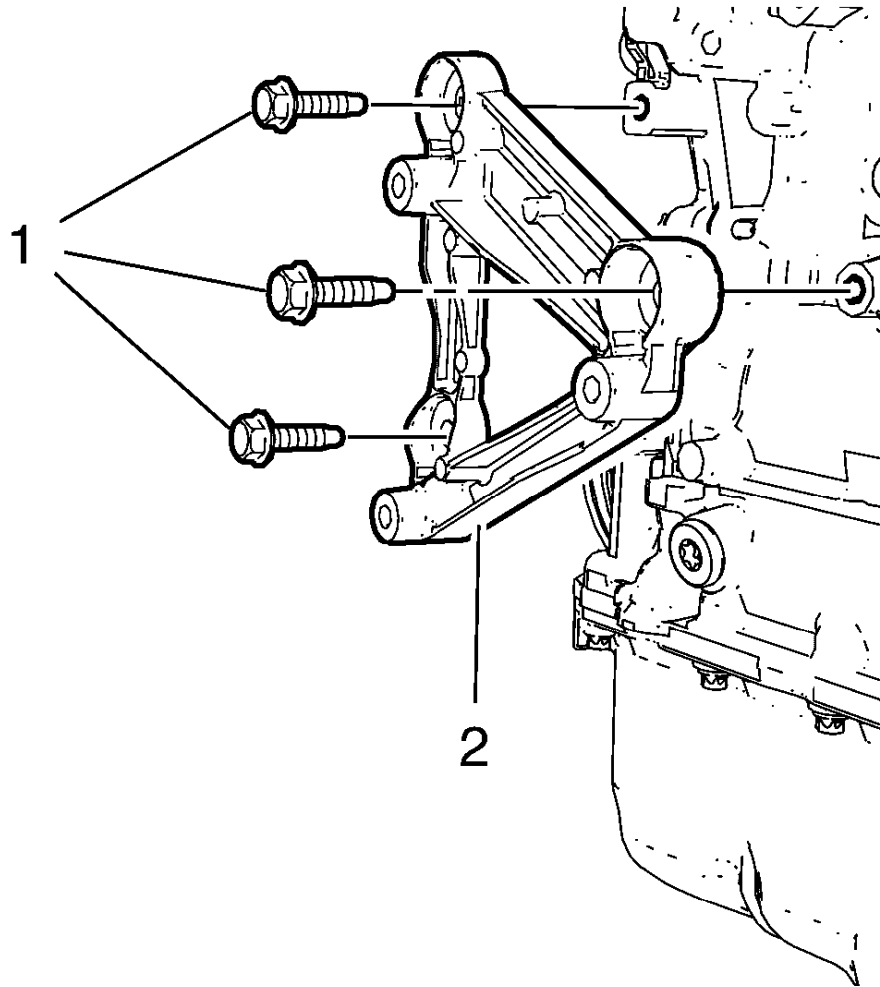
Power Steering Pump Bracket/Air Conditioning Compressor Bracket And Bolts
